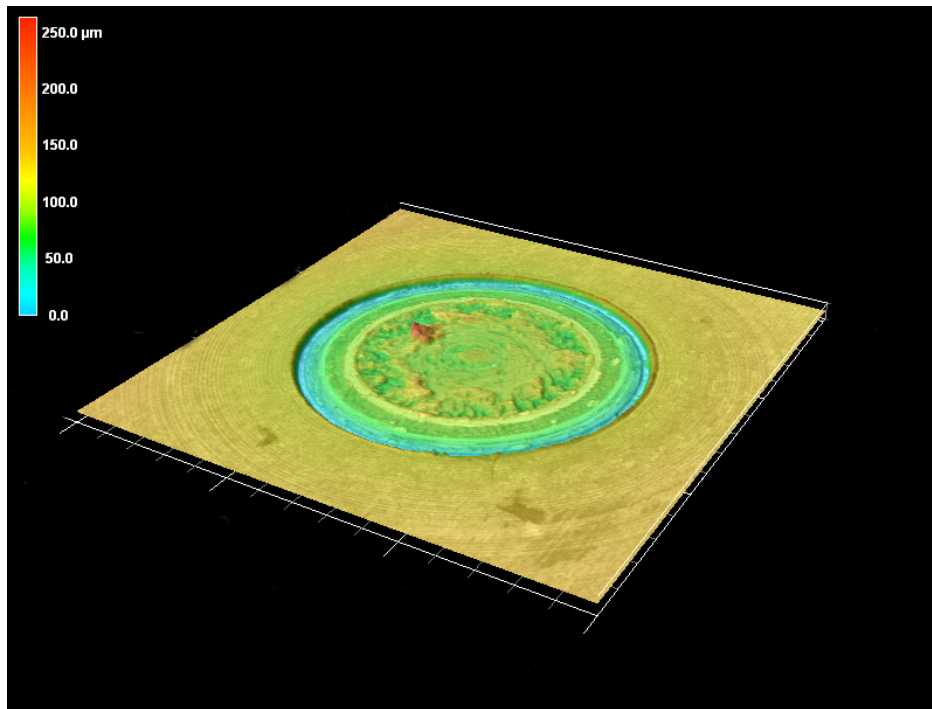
Surface of a weld produced by the most worn tool condition (III).
